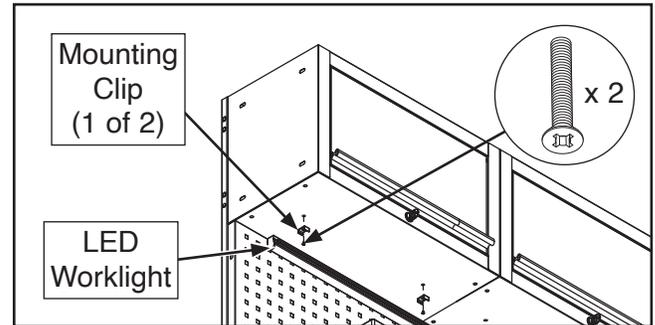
Securing overhead cabinet (doors removed for clarity).
